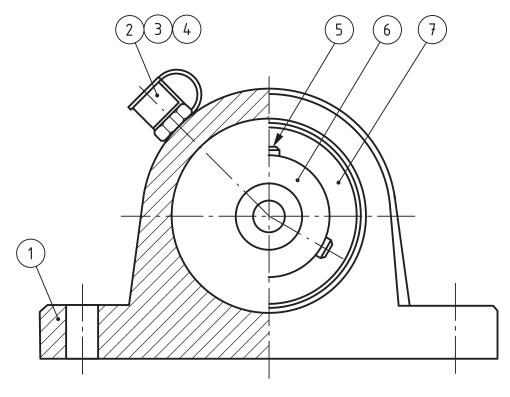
Use of part references on an assembly drawing (standards.iteh.ai)
